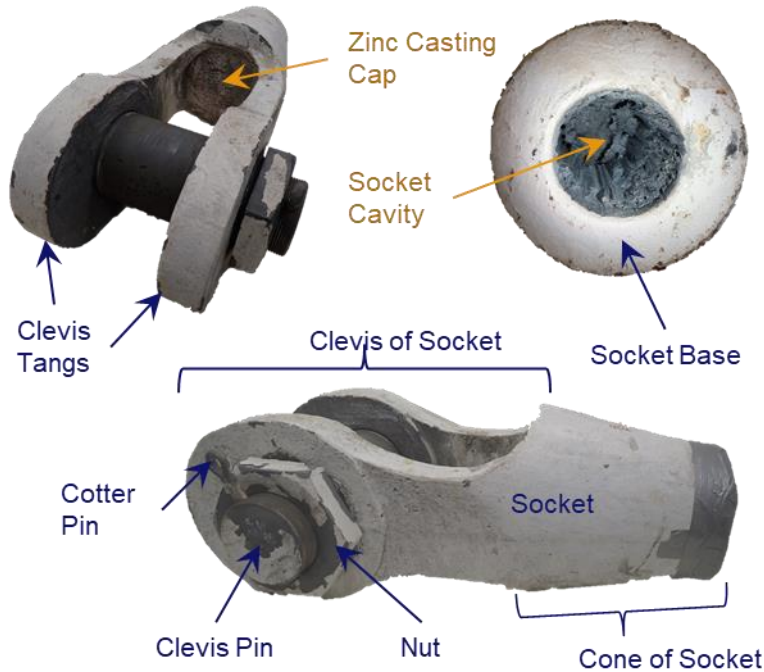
Nomenclature used to Describe Parts of Failed Socket
